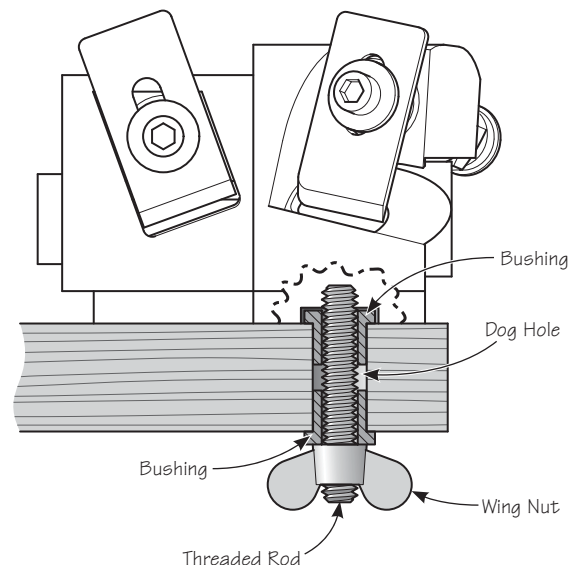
Dowel maker mounted with dog-hole mount assembly.
